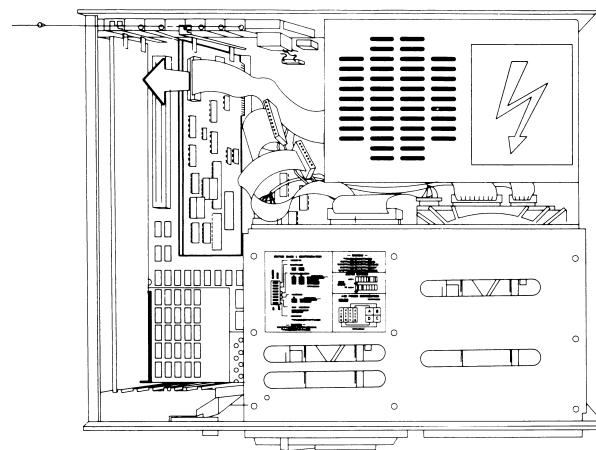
Removing the Diskette/Printer Controller Board Signal Cable.
